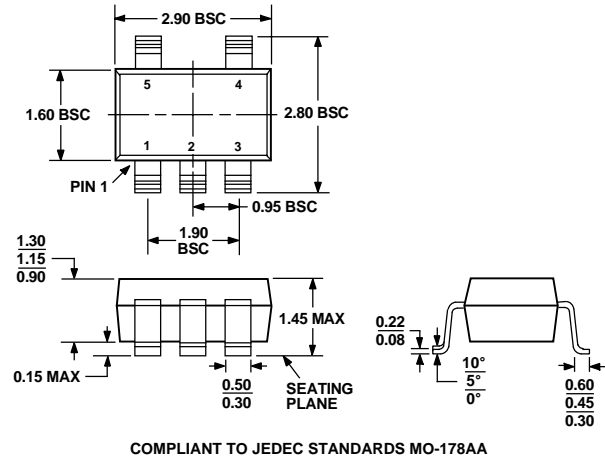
5-Lead Small Outline Transistor Package [SOT-23] (RT-5)
